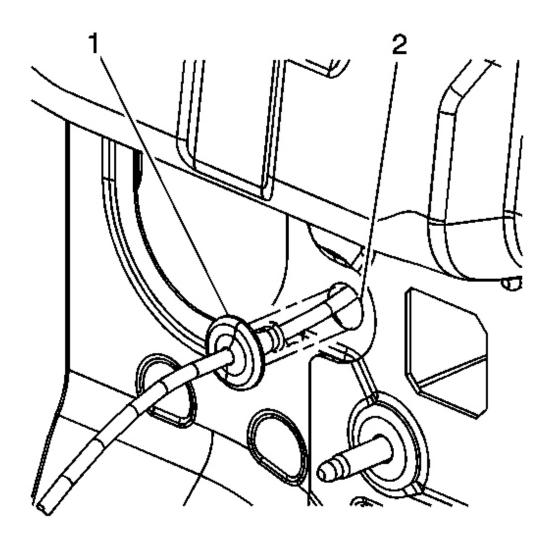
View Of Hood Latch Cable Routing Courtesy of GENERAL MOTORS CORP.
